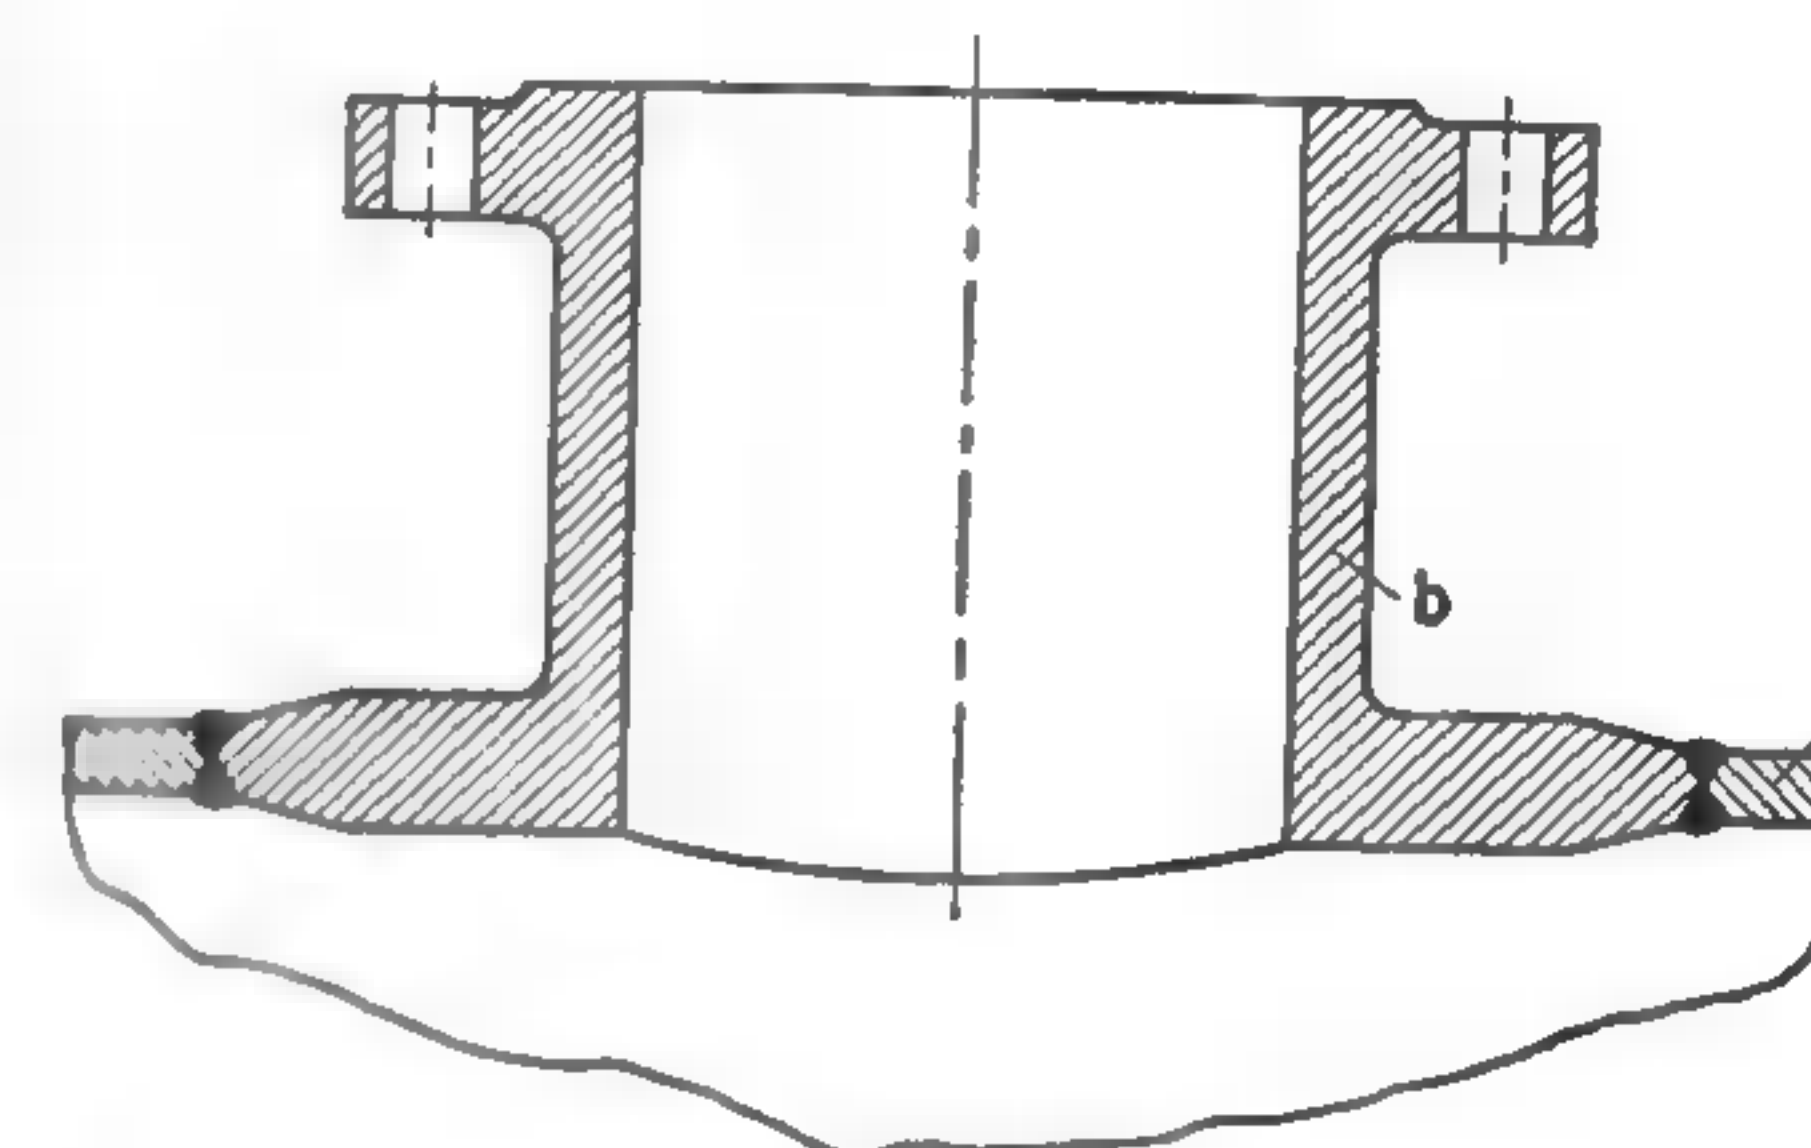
Forged nozzle welded to a shell.
